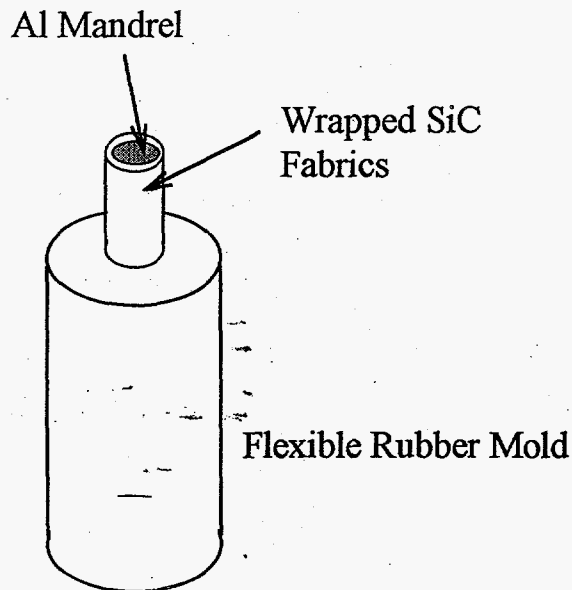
CMC Tube Skeleton formed using Lay-up-Pressure Molding Technique
